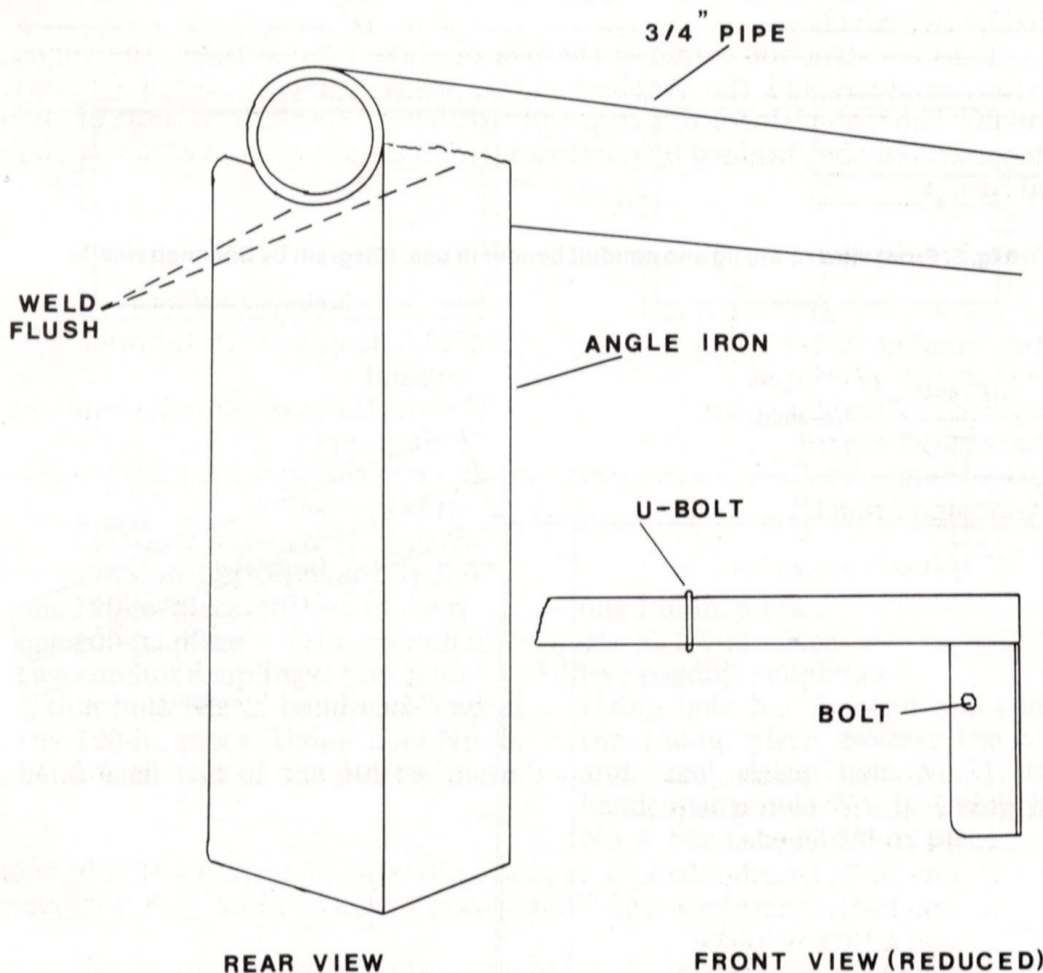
Bending jig. Rear view shows recessed seat in angle iron for $\frac{3}{4}$ -in. pipe and appropriate welds; reduced front view shows jig bolted in place for operation. (Diagram by Shannon Heath)
